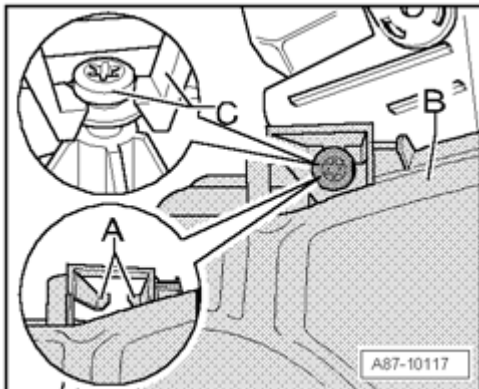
Identifying Footwell Vent, Upper Bolt, And Retaining Tabs
